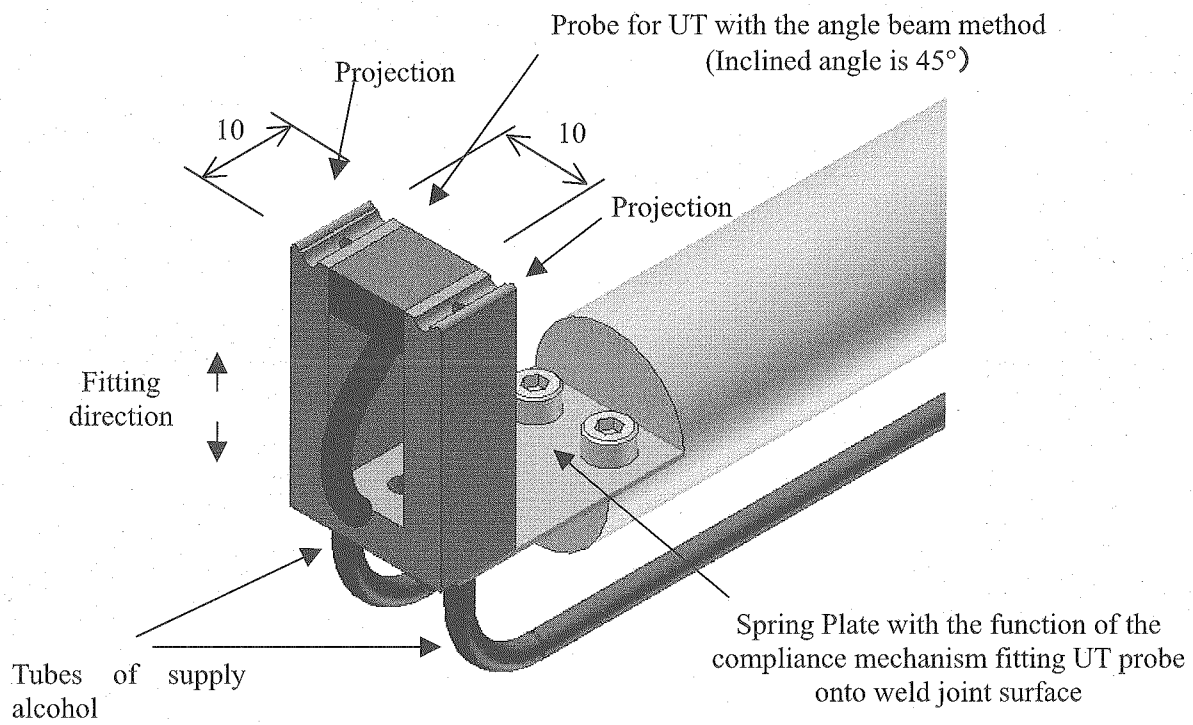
UT Tools for Inspection of FW support leg weldment
